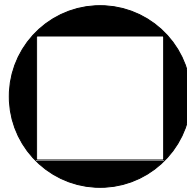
Front view of the cylindrical metal housing with a square hole inside.
